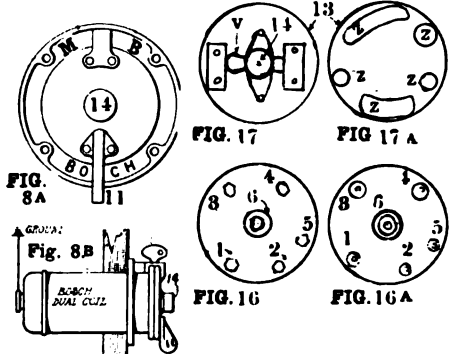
Front view of coil to which the switch is attached; V—is the trembler or vibrator blade (26, fig. 8); 14, the press button contact.
